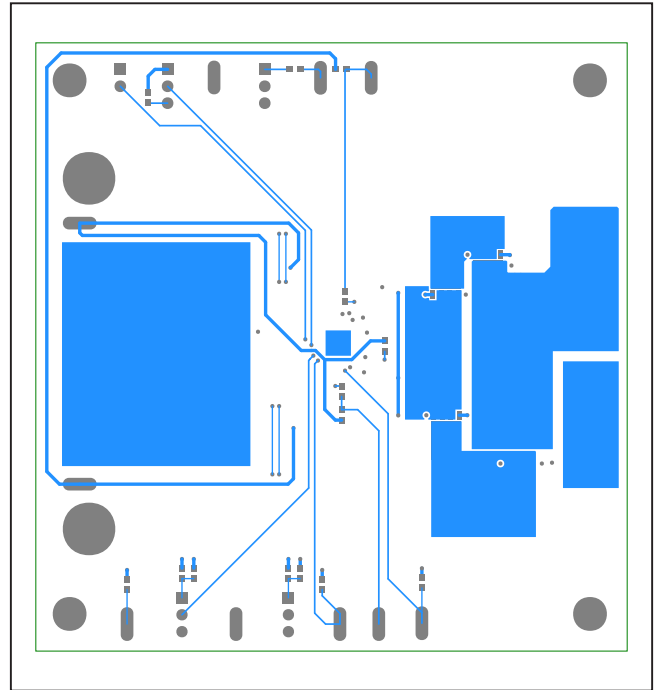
MAX17548 EV Kit PCB Layout—Component Bottom Side
